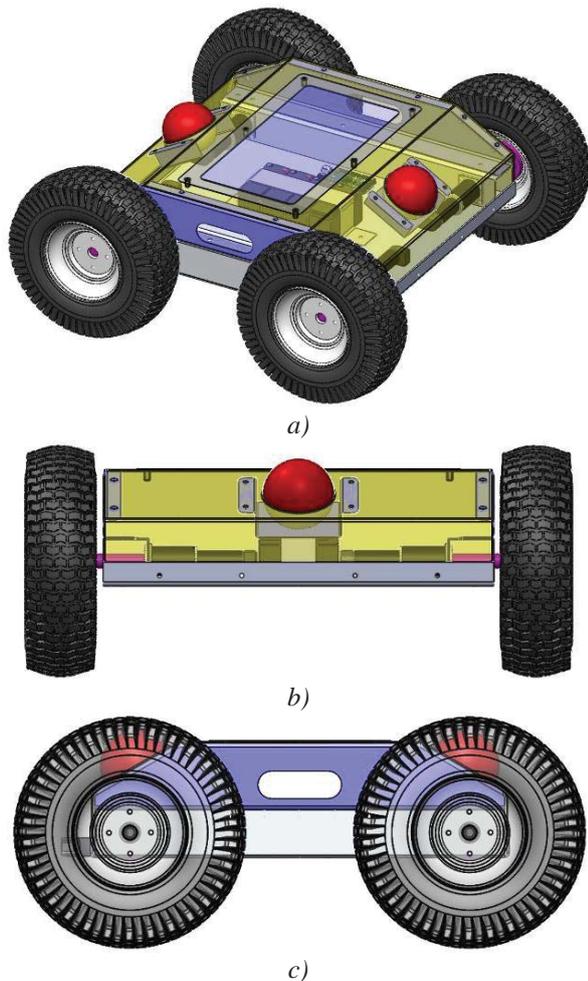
Mechanical design: a) 3D view; b) front view; c) side view.
